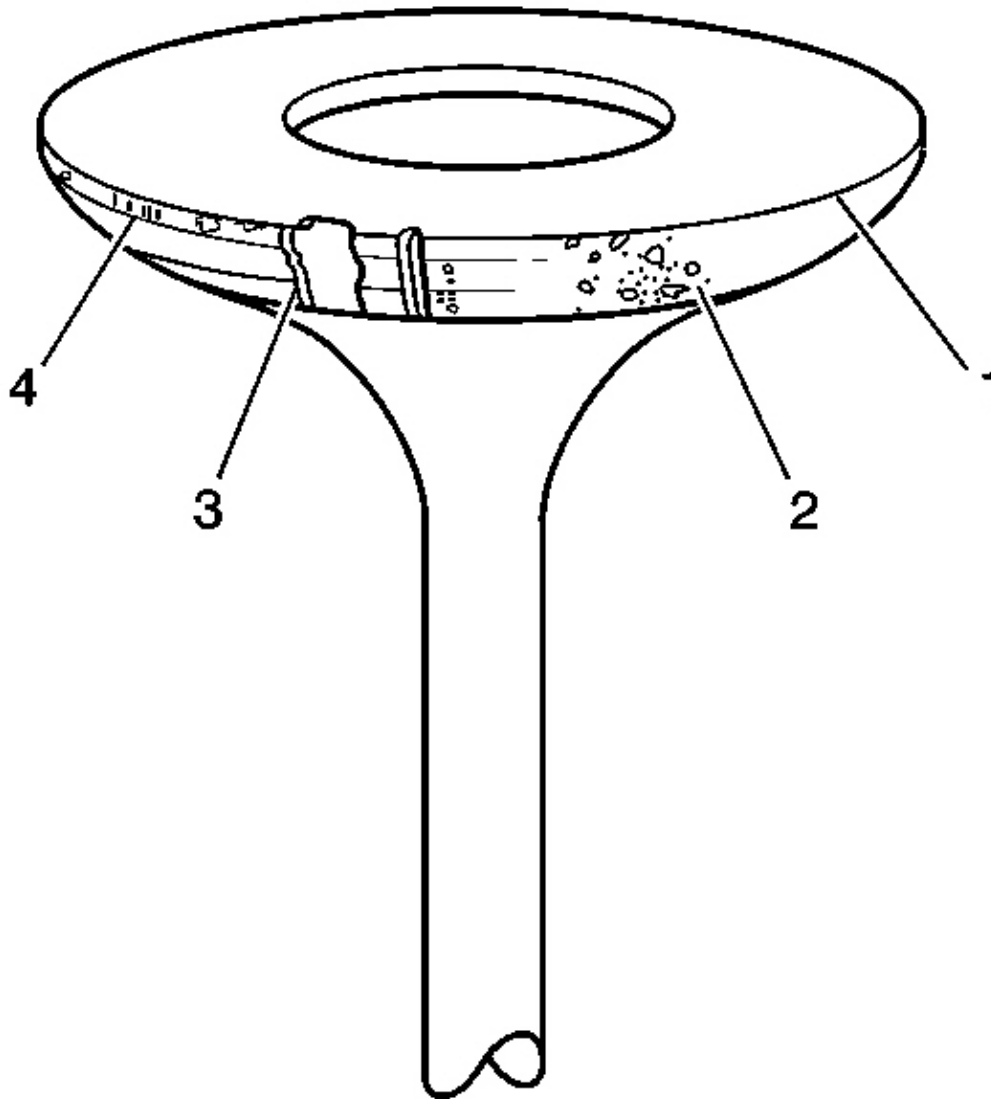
Inspecting Valve Face For Burning, Pitting & Cracking
